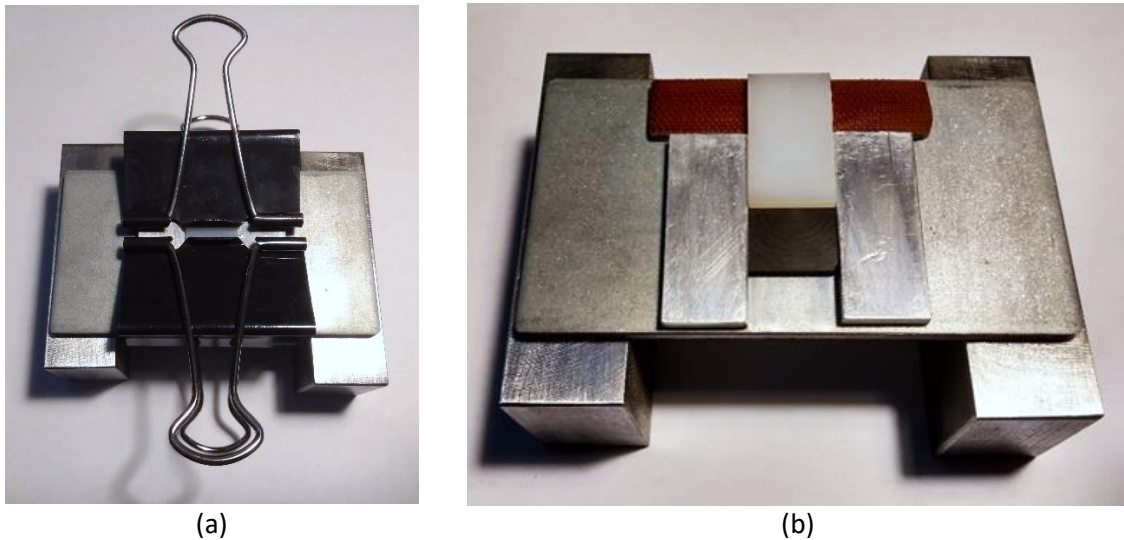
Clamping device in its final configuration (a) and positioning of the specimens (b).
